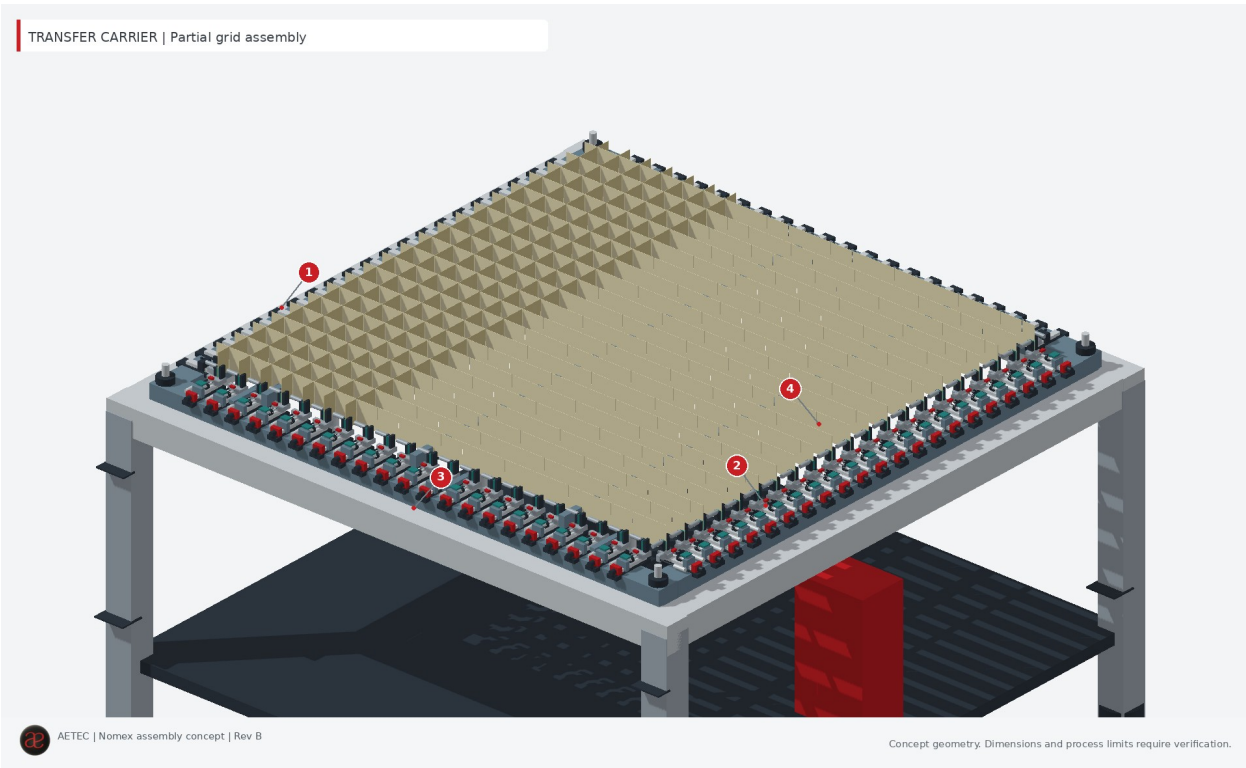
Partial grid on an open carrier. 1 Datum clamps; 2 floating clamps; 3 carrier frame; 4 retractable comb supports.
